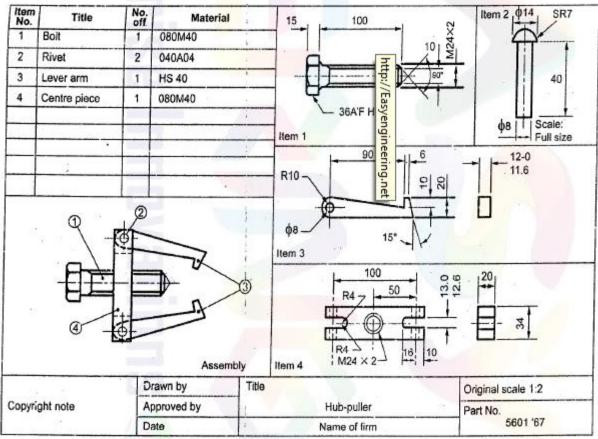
Combined detail and assembly drawing of hub-puller
